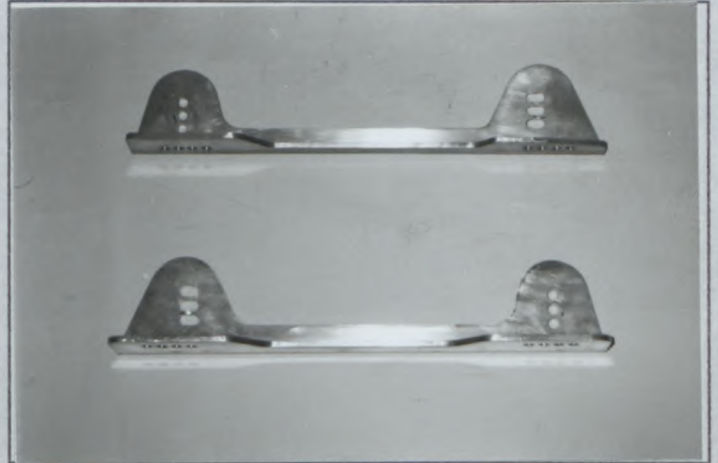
SEAT MOUNTING BRACKET ( Dr. Seat )
